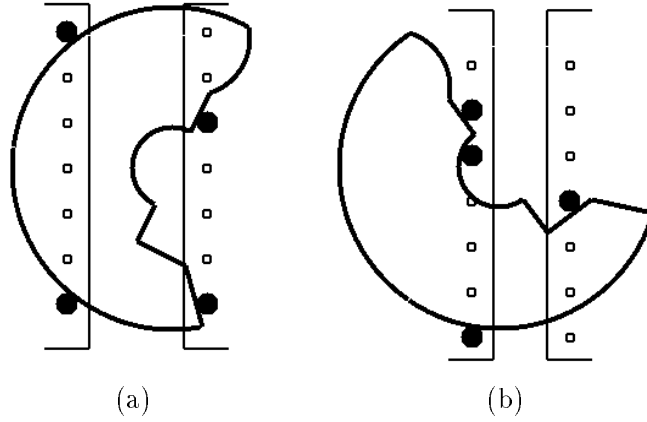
(a) a Type I fixture for flange (b) a Type II fixture for flange
